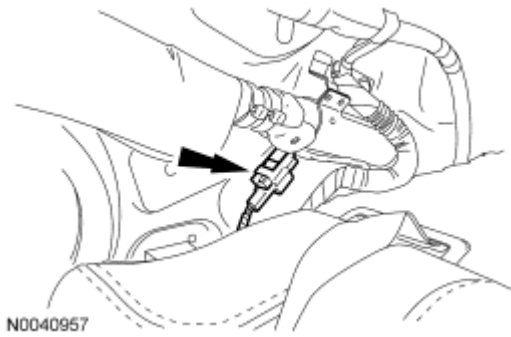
Locating RH Side Air Curtain Module Electrical Connector
